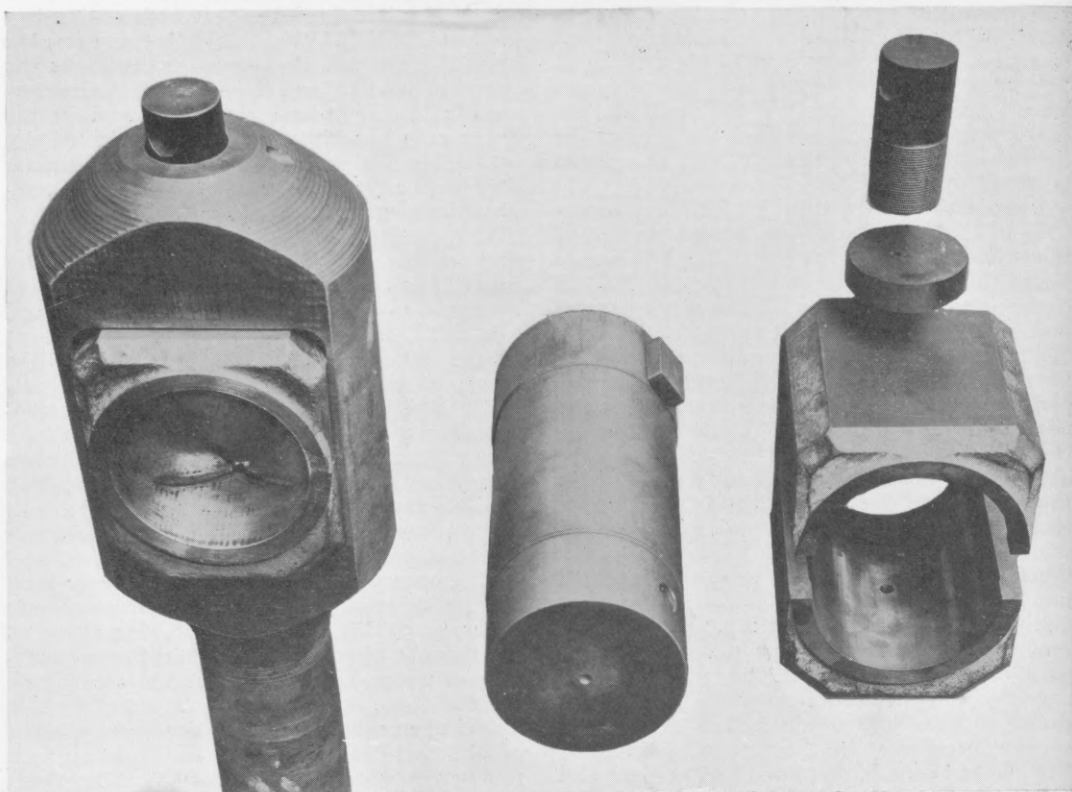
Wristpin box parts of trunk piston engine; boxes and pressure screw
